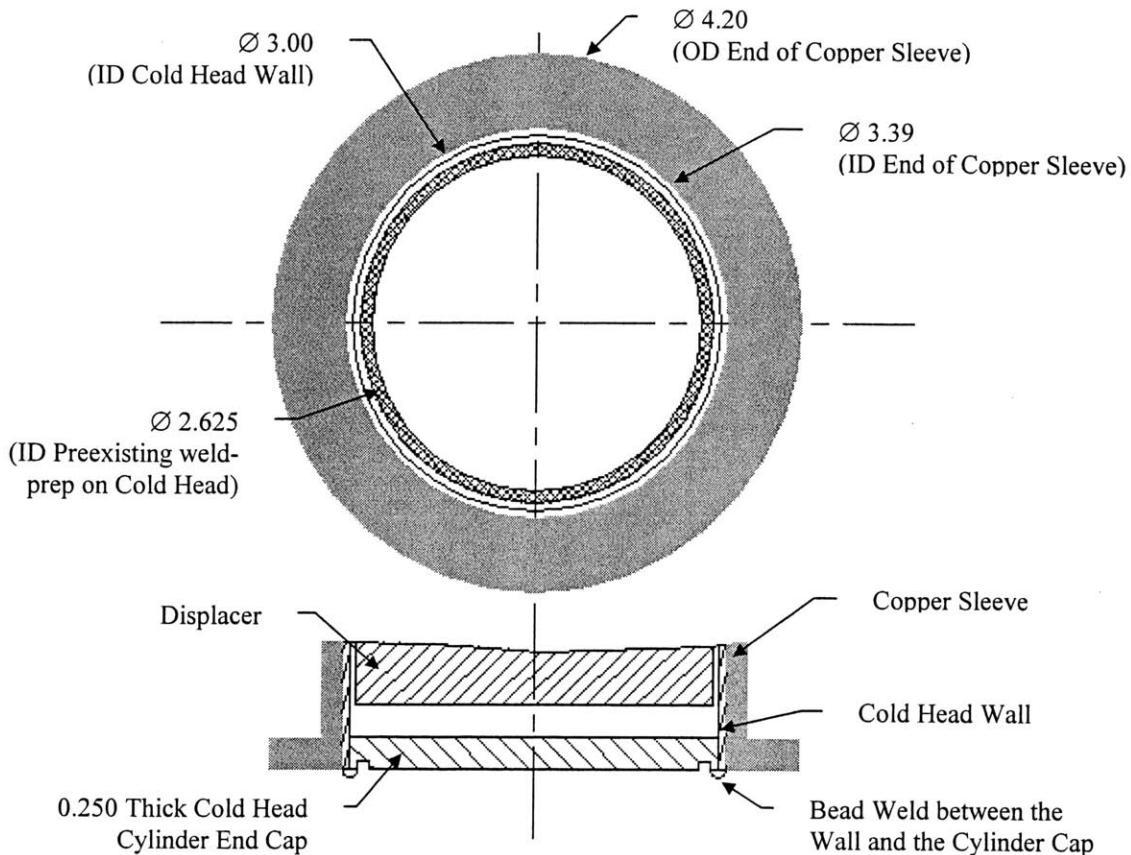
Close up view of the cold end geometry depicting weld-preps, cap thickness and pertinent geometry.
